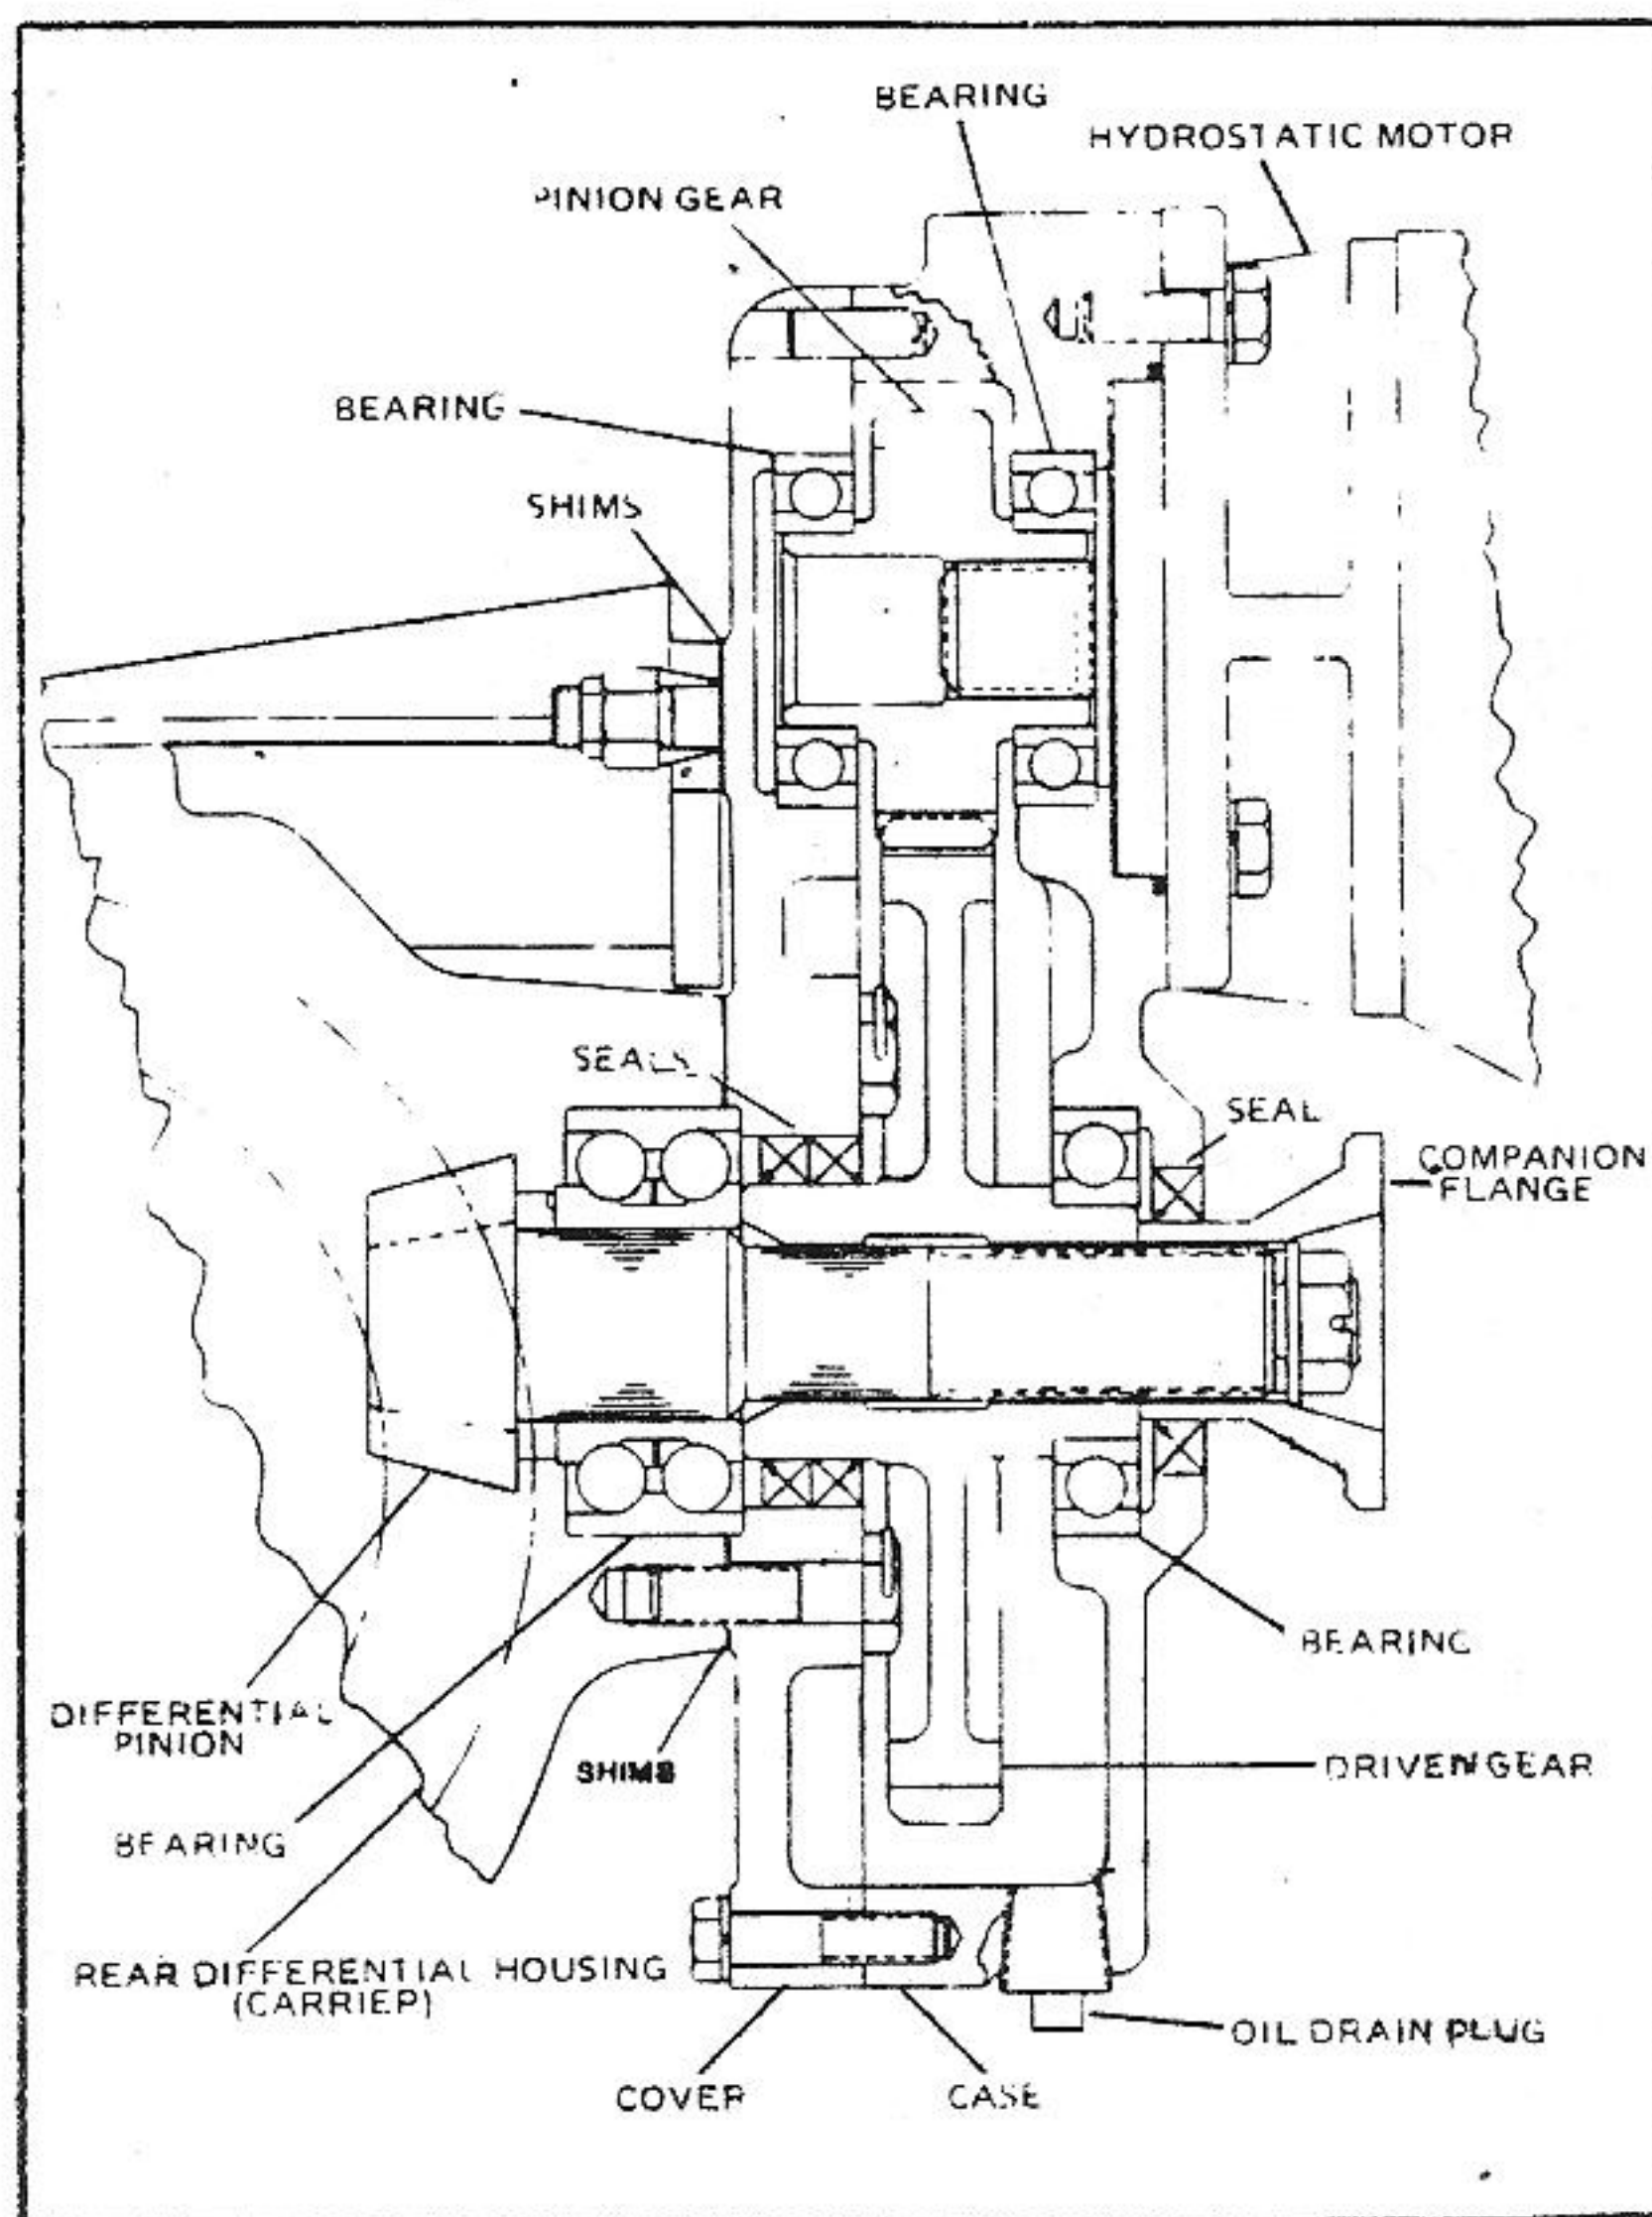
8. TRANSFER CASE, CROSS-SECTIONAL VIEW
